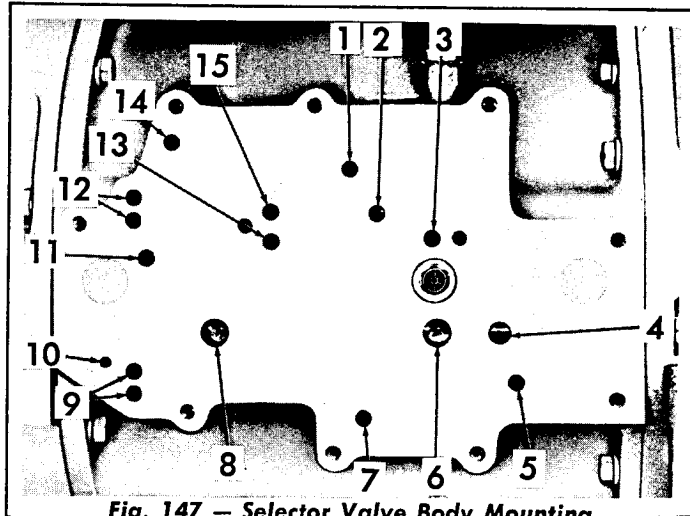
Selector Valve Body Mounting Pad Oil Passages
